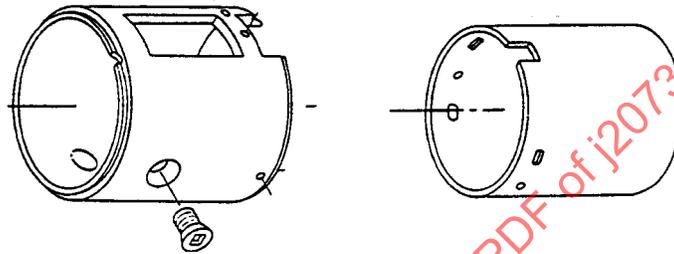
FRAME AND FIELD ASSEMBLIES
